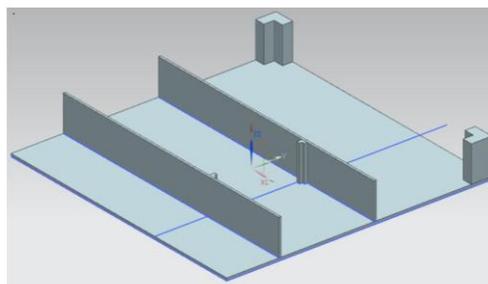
Fixture for heat sink mounting and holding the painting fixture
